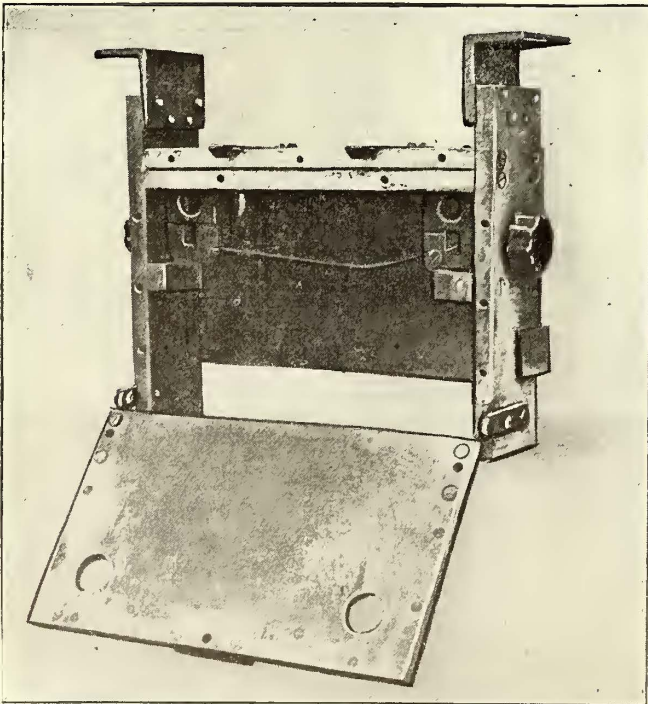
Maintenance of Equipment—Improved Main Fuse Box
